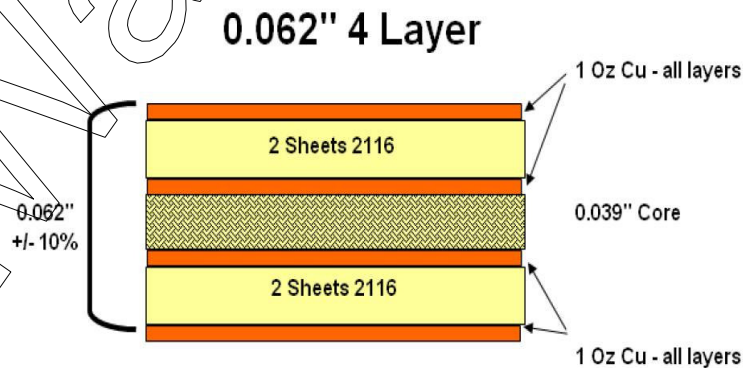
Vendor standard stack-up of 4-layer PCB with 62 mil thickness
